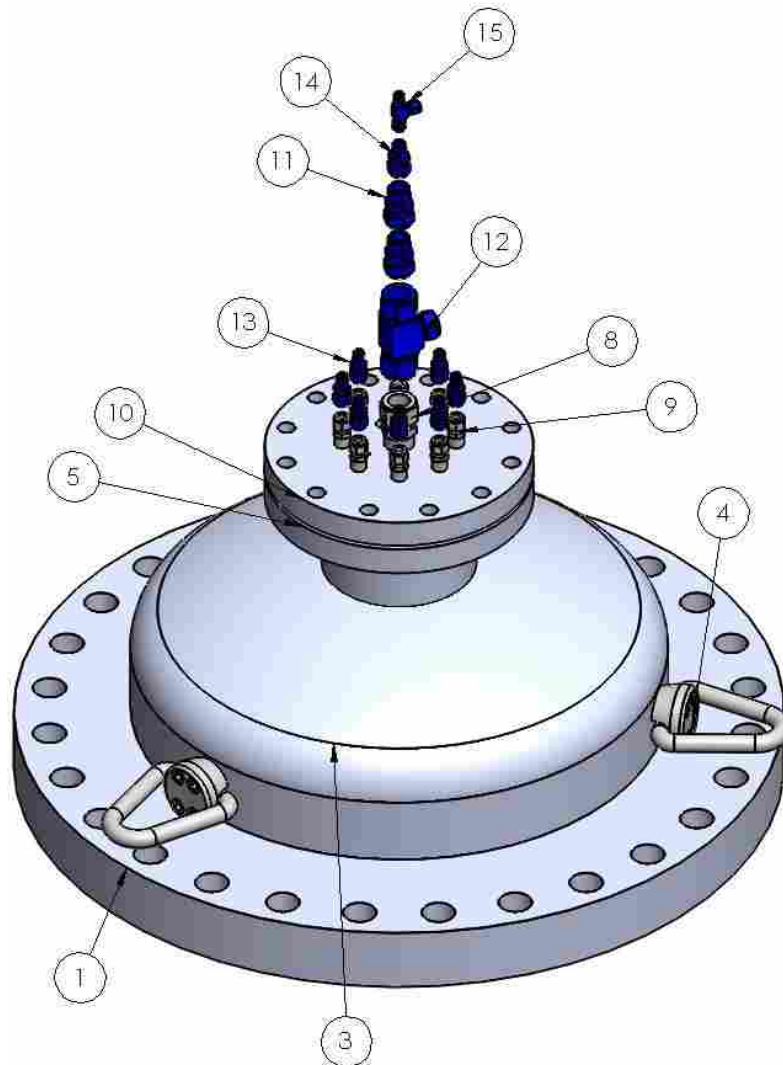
Drawing of Isometric View of Cap Burner with Swagelok Fittings and Bill of Materials
